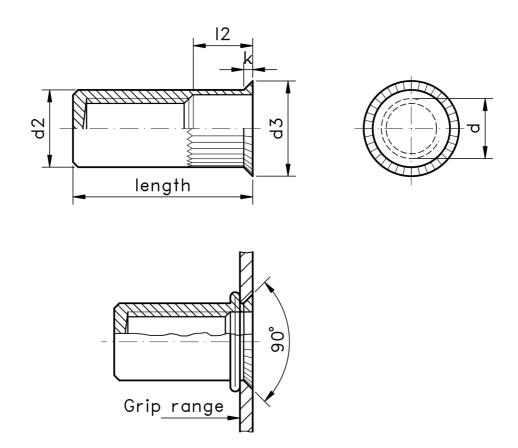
Rivet nuts with a Reduced Countersunk Head and Knurled Shank, Closed Type
